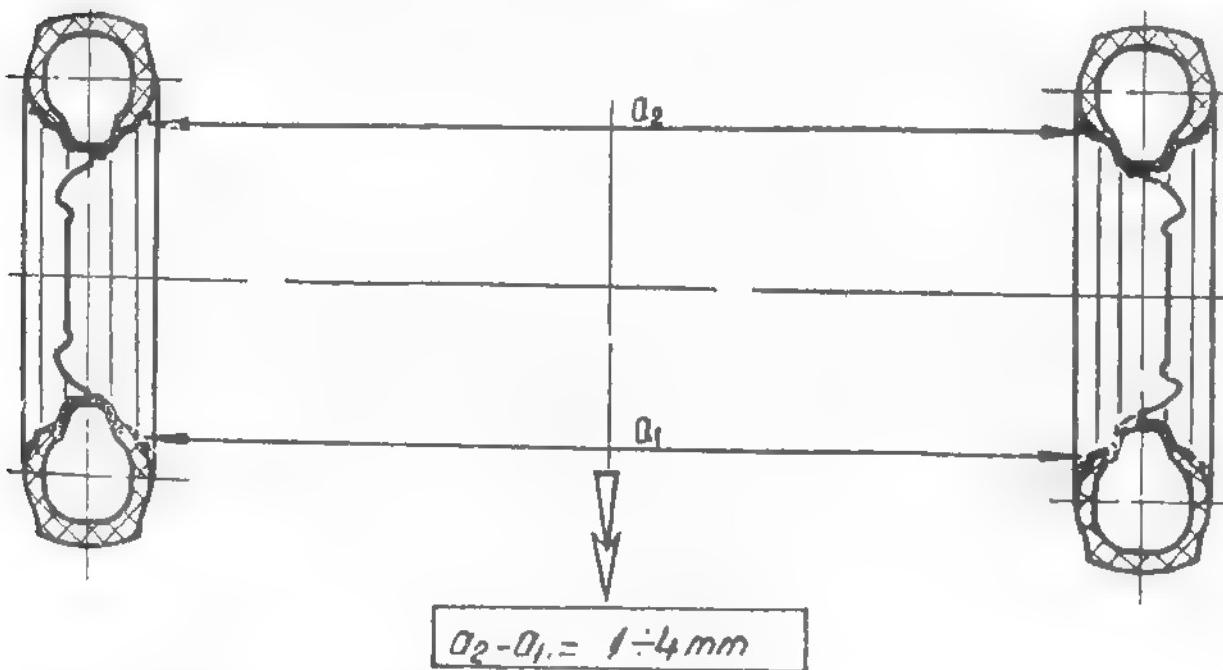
MEASURING FRONT WHEEL TOE-IN.
